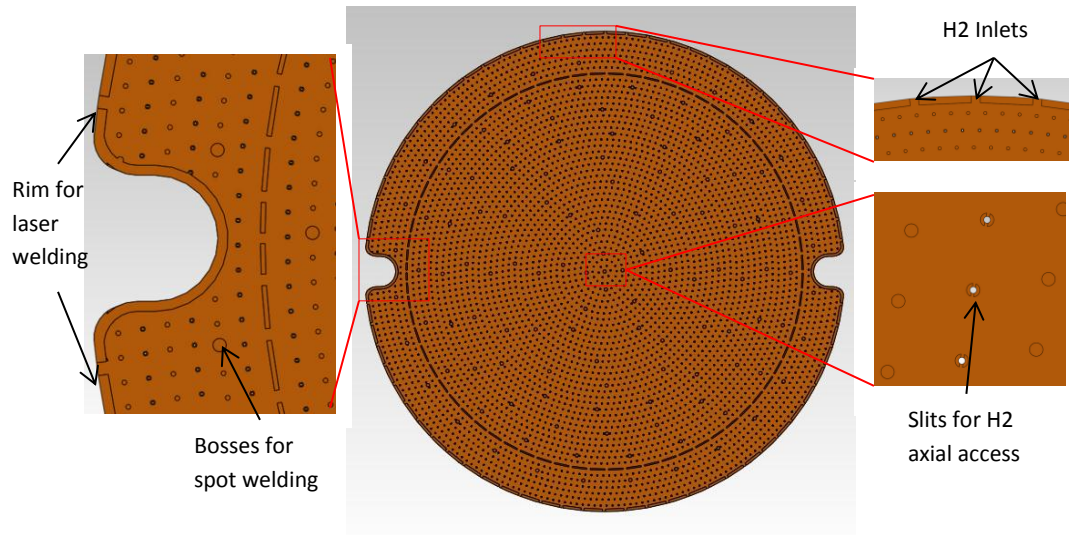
Schematic of hydrogen distributor bottom plate showing the rim for welding, spot welding bosses and slits for hydrogen axial access and hydrogen inlets.
